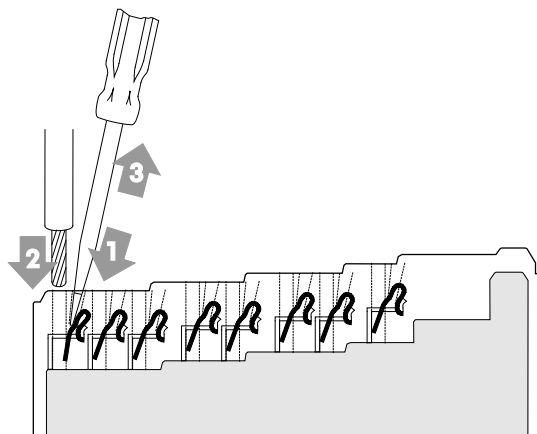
Connecting a Conductor to a Push-in CAGE CLAMP®
